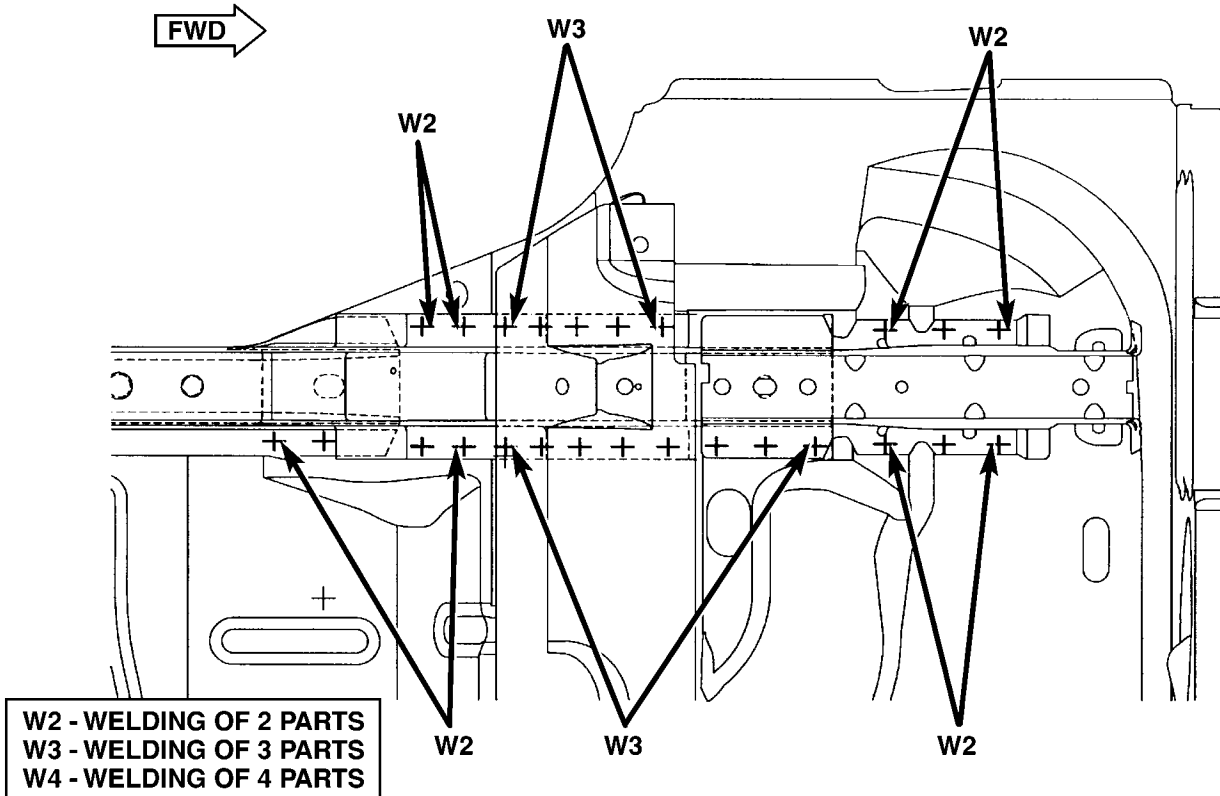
REAR SIDE RAIL EXTENSION TO CENTER FLOOR PAN SIDE RAIL & REAR SUSPENSION CROSSMEMBER TO REAR FLOOR PAN
